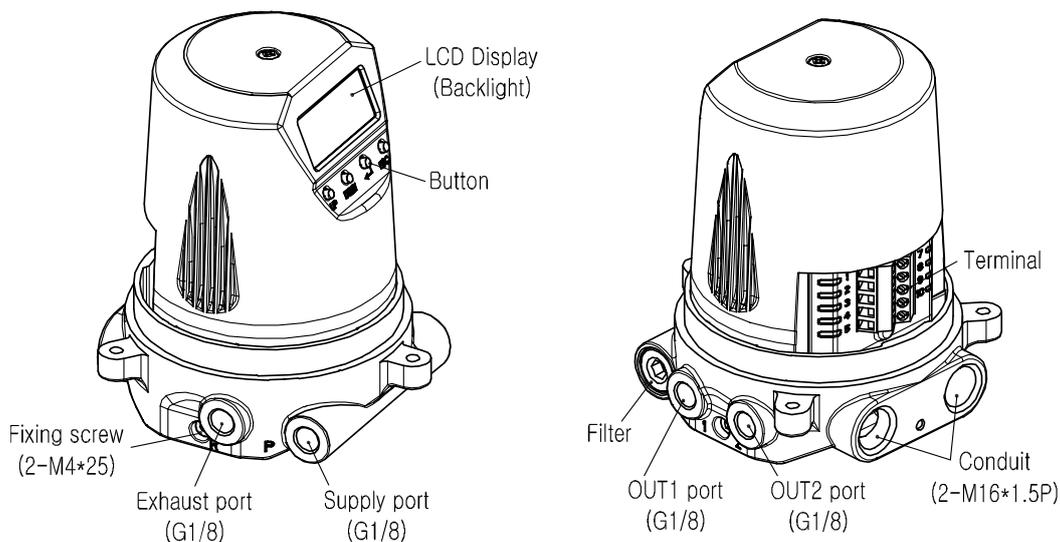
TMP-3000 Exterior Parts and Description (Base Cover Removed)
